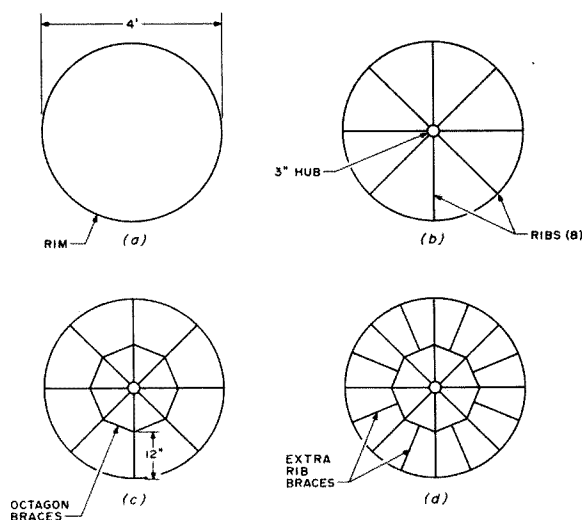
(a) Rim dimensions. (b) Spoke installation. (c) Octagonal bracing placement. (d) Installation of extra rib braces.
